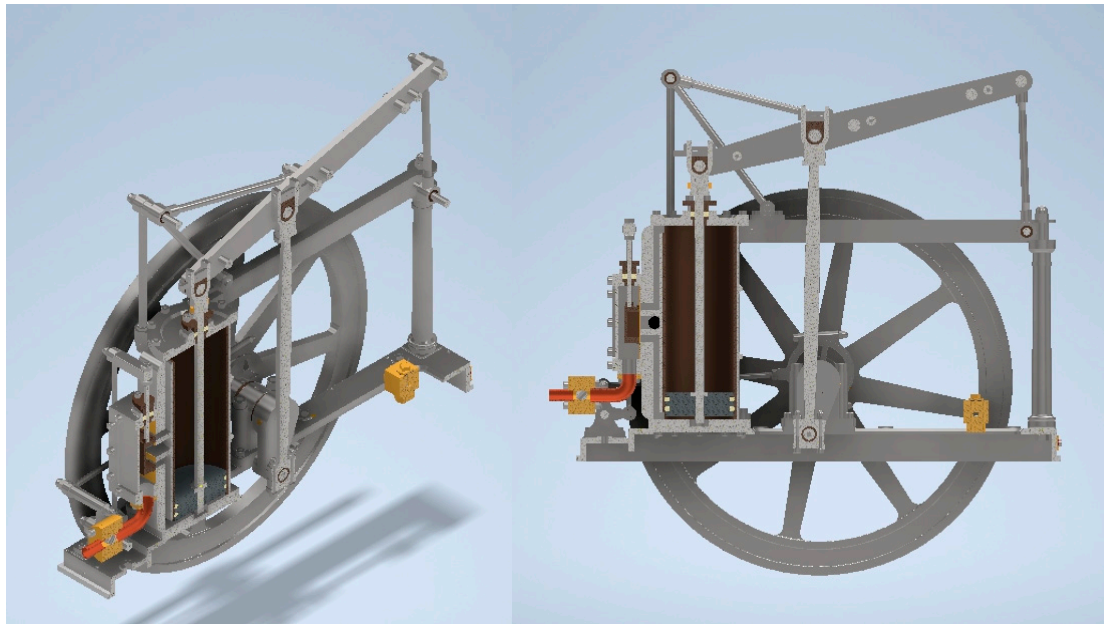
Sectioned views of the assembly: axonometric view (left) and front view (right).
